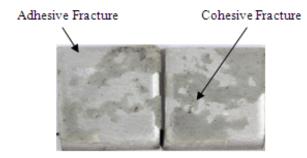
Failure mode of adhesive joint mixed with silica powder.
